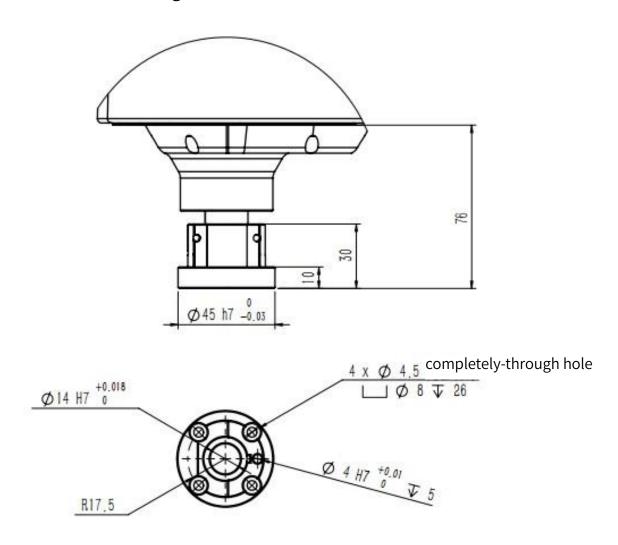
Installation dimensions of terminal flange (Unit: mm)
